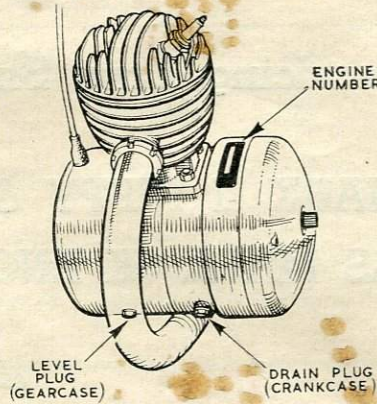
Front view of the power unit, showing crankcase drain-plug.
